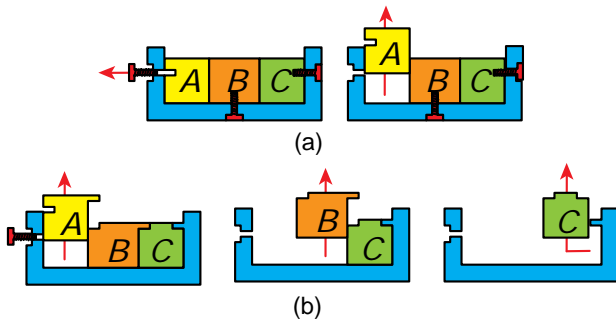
(a) conventional assembly and (b) assembly designed for product embedded disassembly [4].
